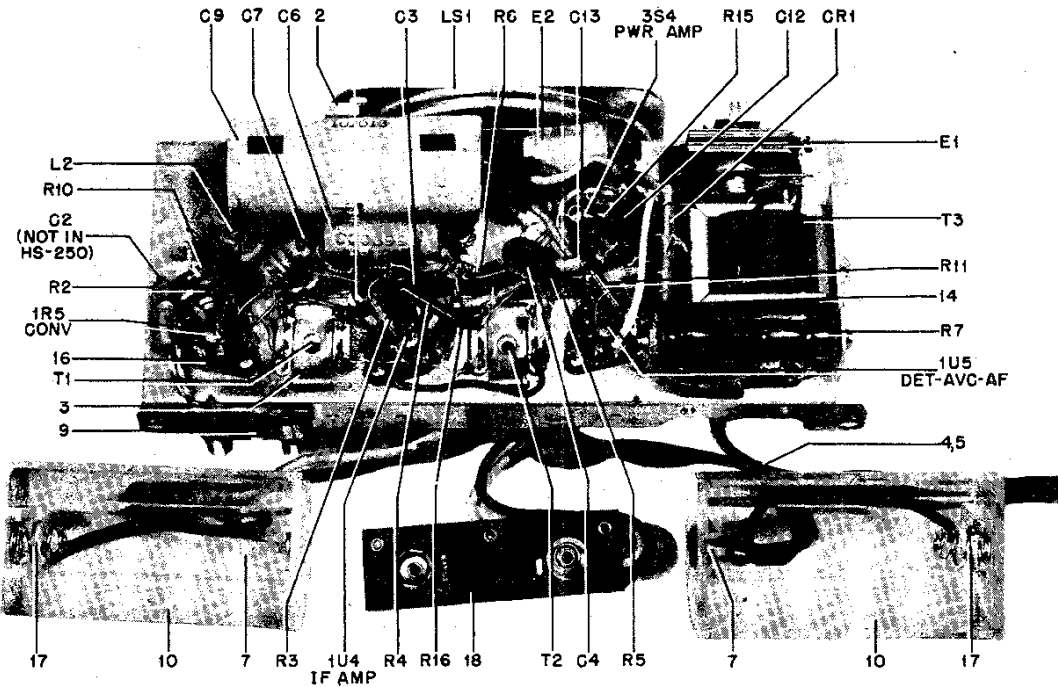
BOTTOM VIEW OF CHASSIS HS-224 AND HS-250 SHOWING MULTIPLE CAPACITOR-RESISTOR PLATE
